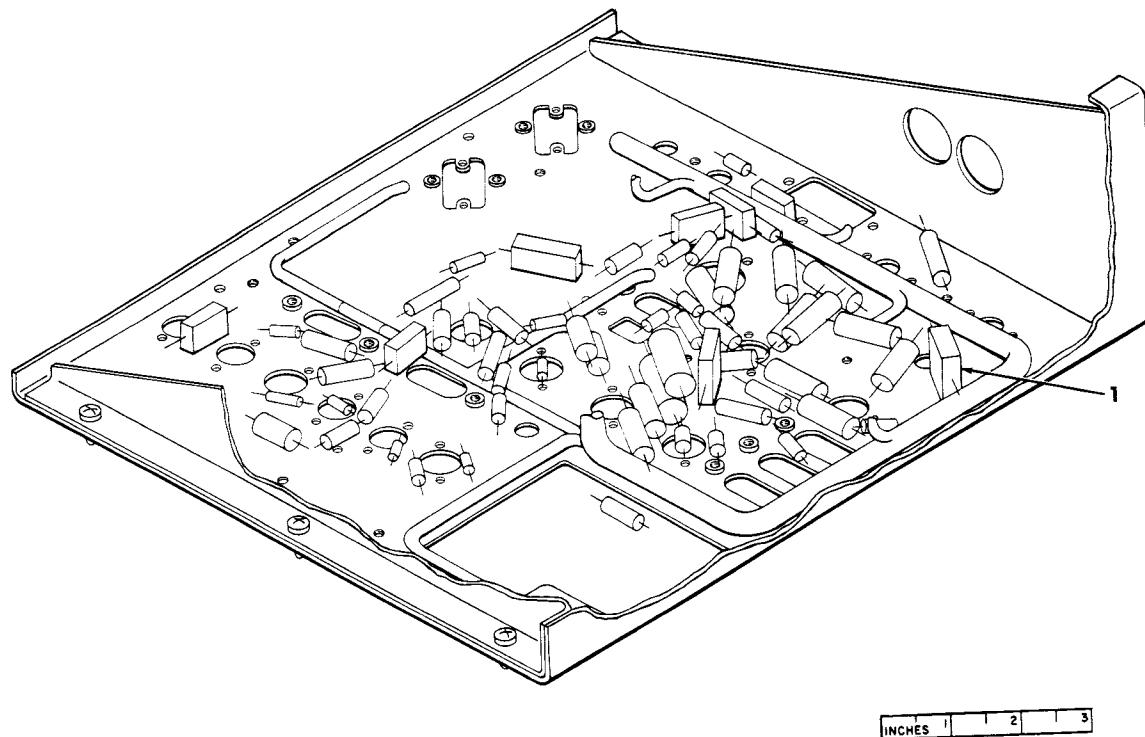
Oscilloscope OS-49/M (8007722) - partial exploded view
